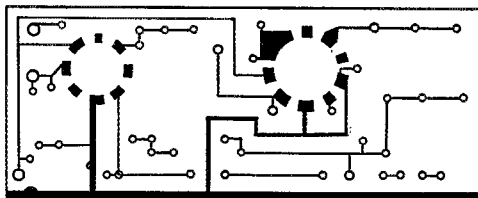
Wiring layout made in pencil before transferring to foil. Note eyes, socket layout and connecting lines.
